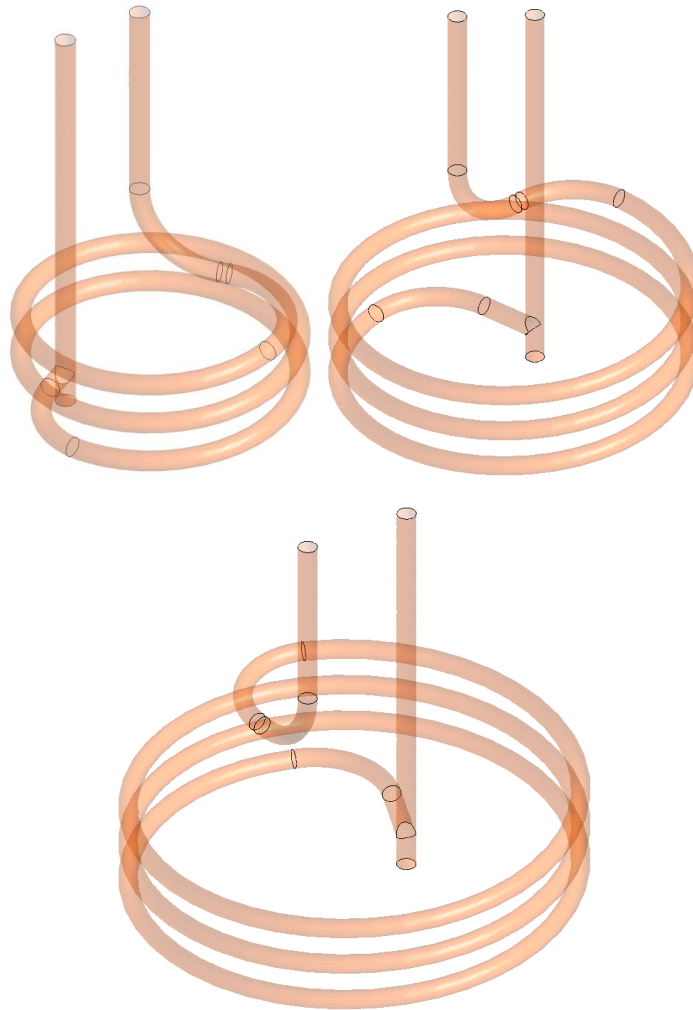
Isometric views of the lower inner coil (top left); lower middle coil (top right); and the lower outer coil (bottom).
